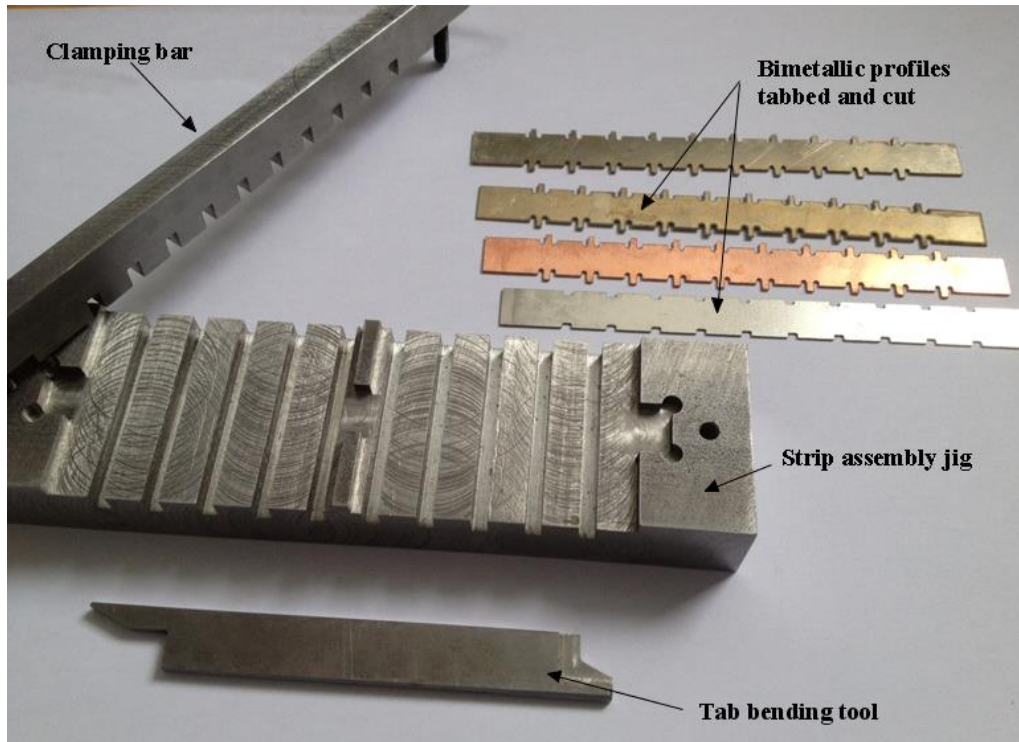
Water jet cut test samples prior to assembly in fabrication rig.
